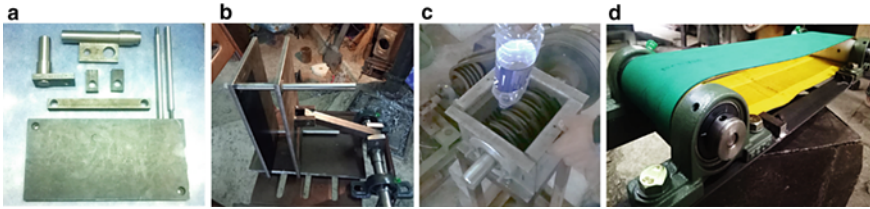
a Components of crusher, b crusher, c shredder, d conveyor
